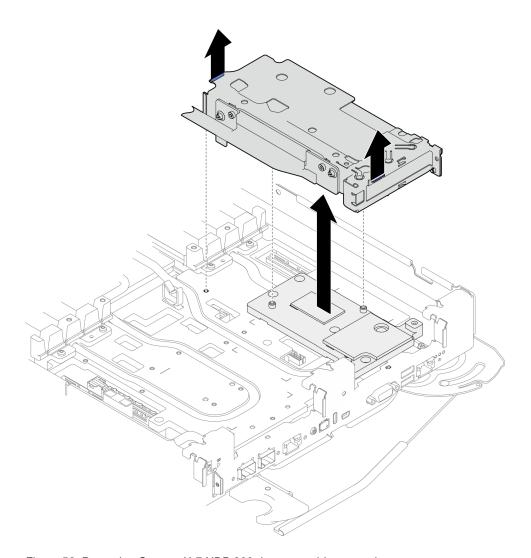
Removing ConnectX-7 NDR 200 riser assembly removal
